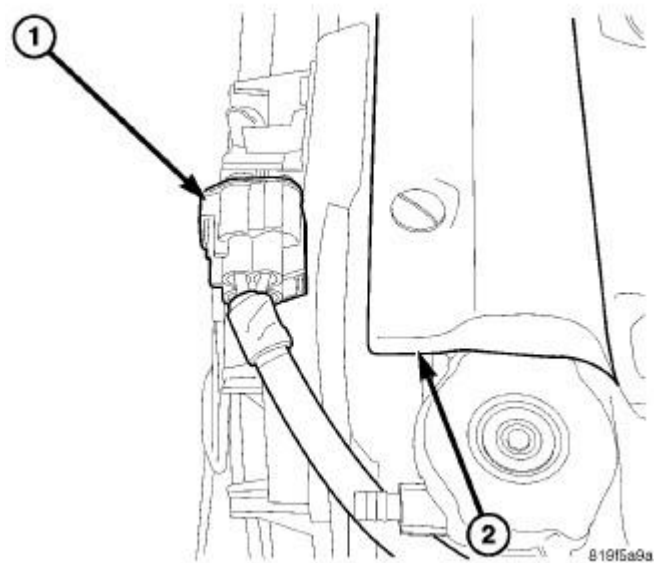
Radiator Fan Electrical Connector & Upper Radiator Seal
